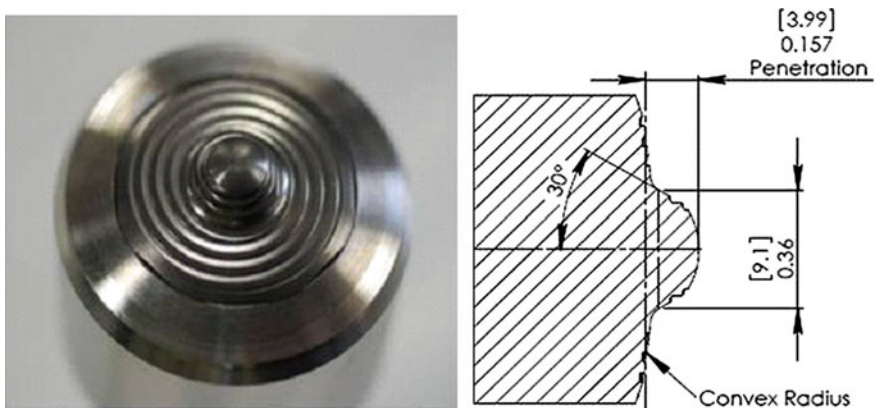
Appearance and dimension of the tool used in this study. Unit: [mm] inch
